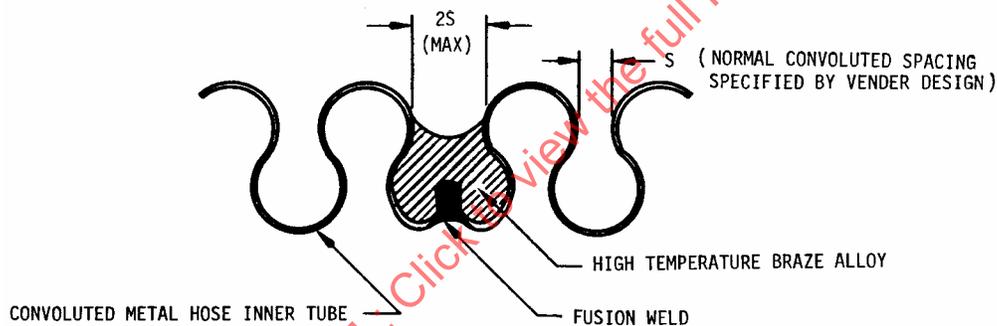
INNER TUBE SPLICE CONFIGURATION
